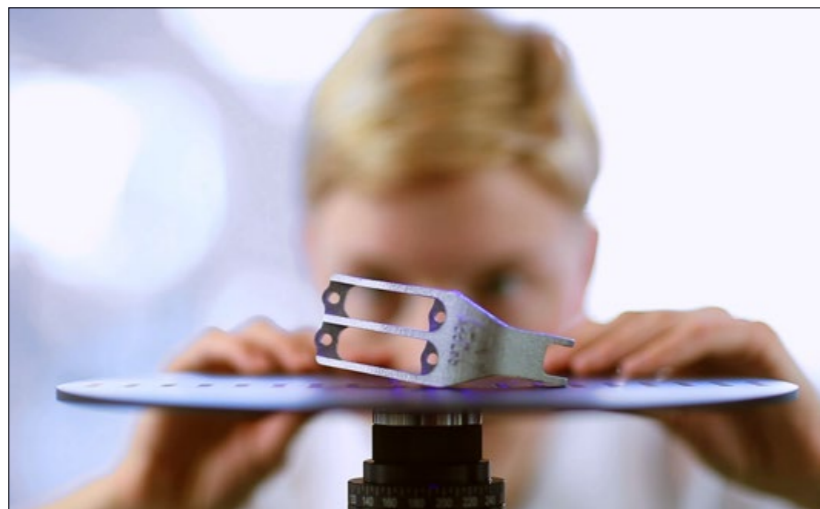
AM part being aligned on a 3D scanner stage for dimensional control (Photo Additive Industries/AddLab)
